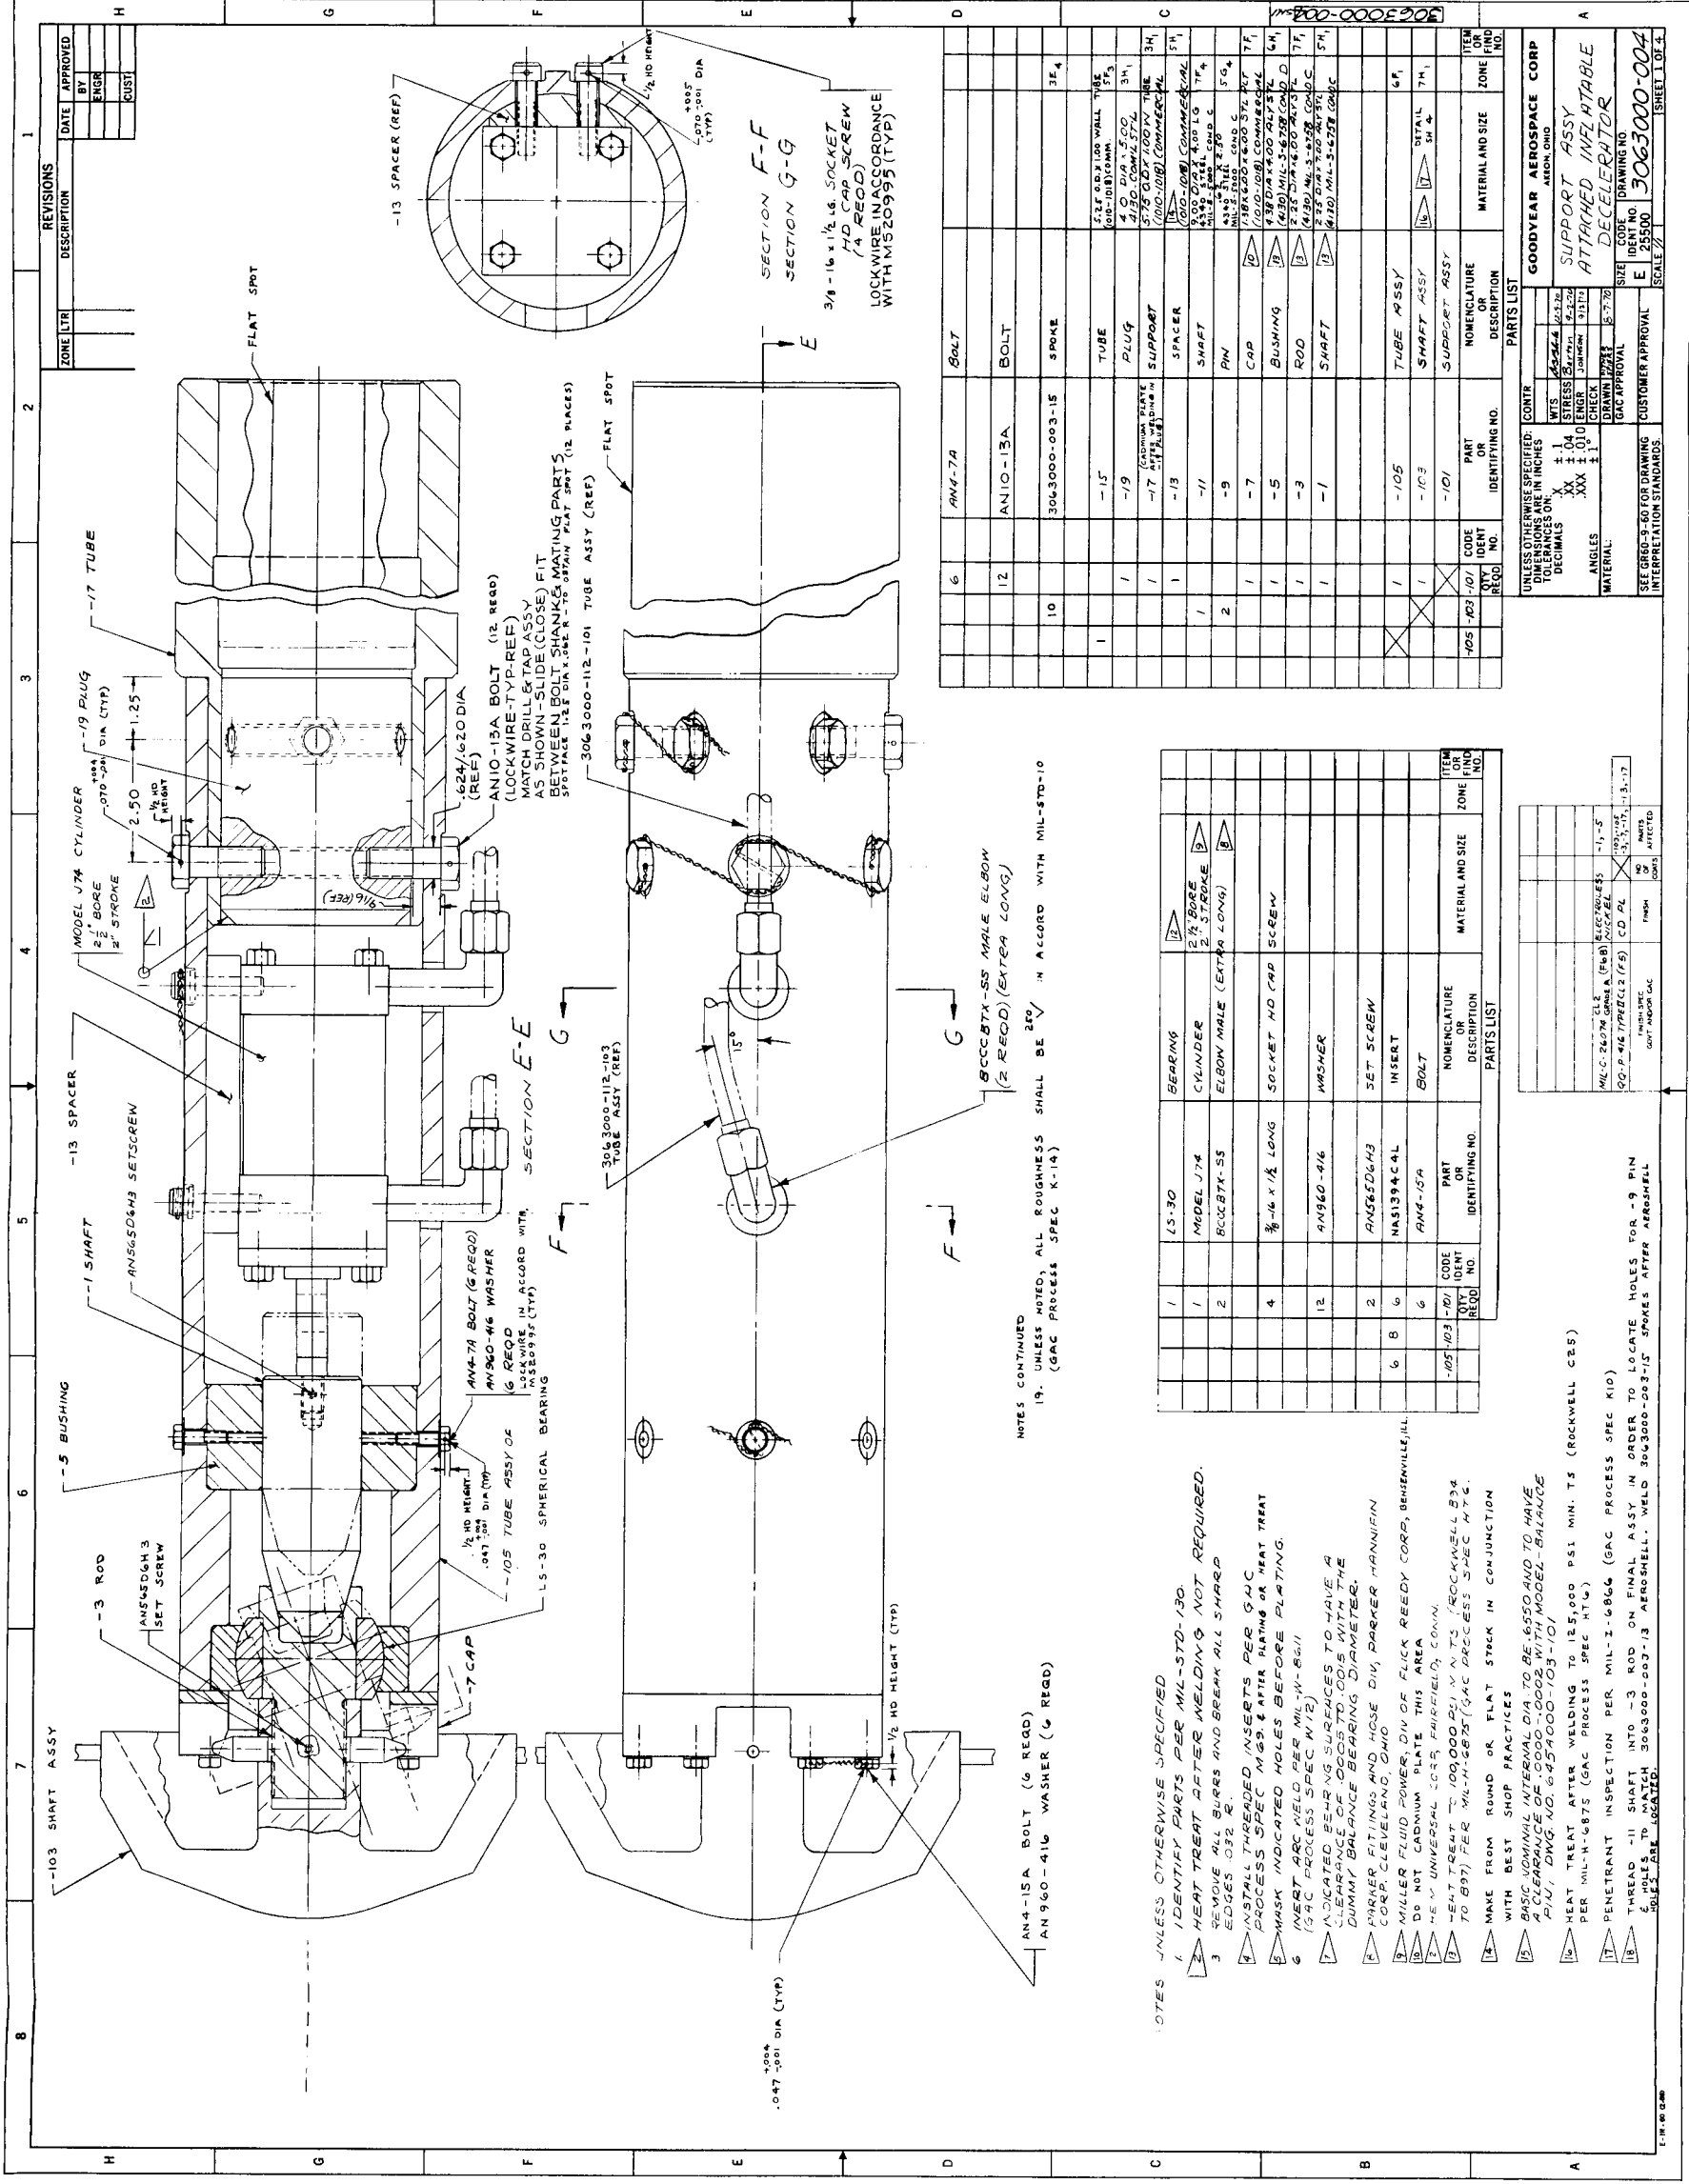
Support Assembly, Attached Inflatable Decelerator Drawing 3063000-004, Sheet 1
